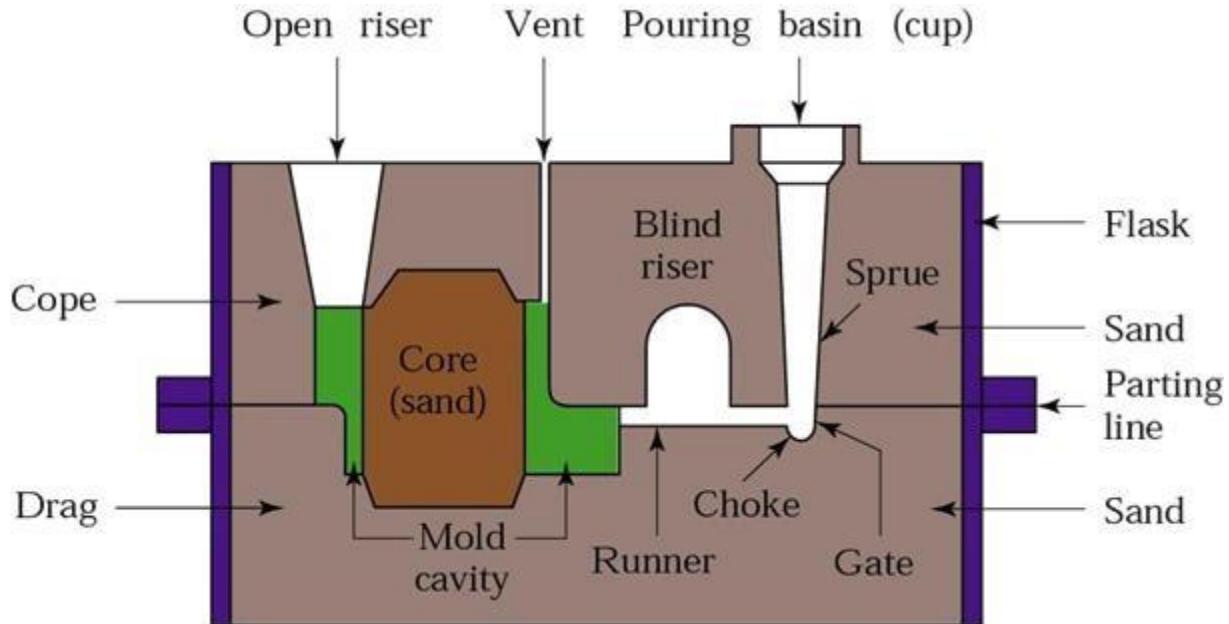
Schematic of a typical two-part sand mould, indicating various mould components and terminology [<https://www.iqsdirectory.com/articles/sand-casting.html>].
